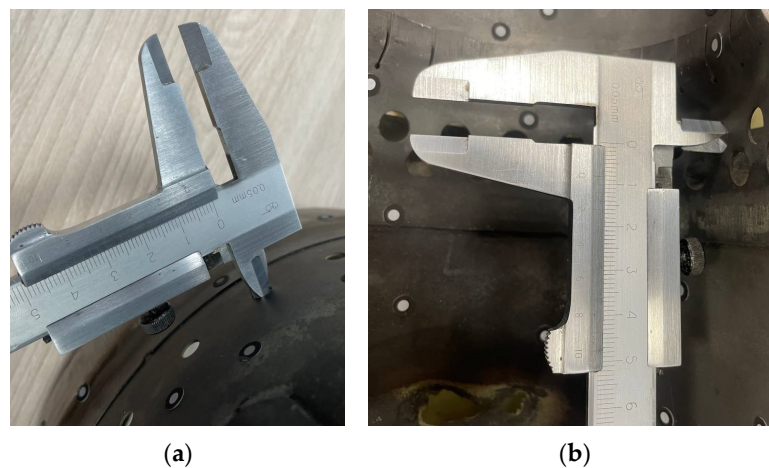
Obtaining the geometric dimensions of the diameters of the cooling and mixing holes using a caliper: (a) measurement of mixing holes; (b) measuring the cooling holes.
